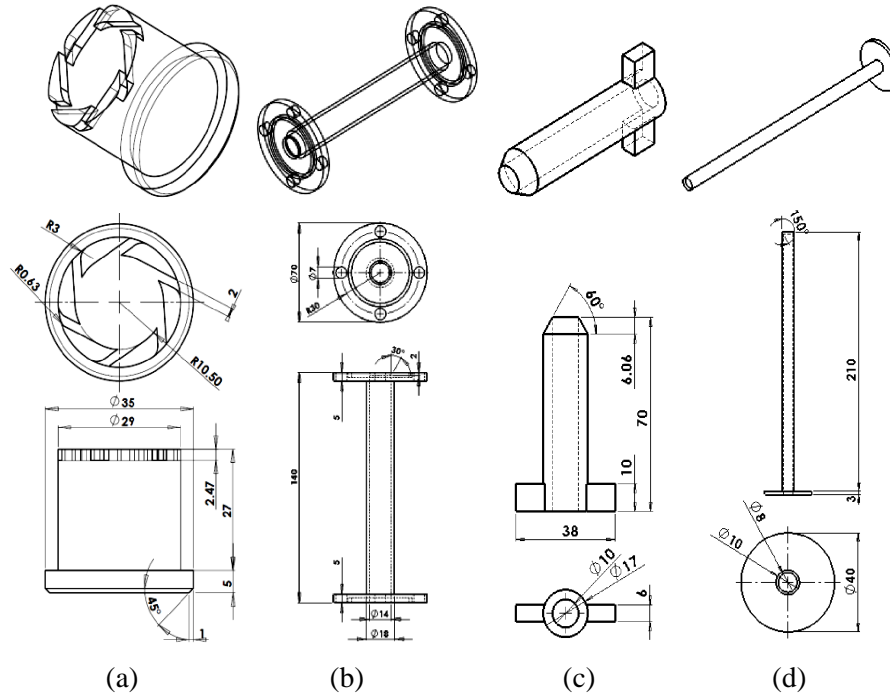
Each elements part of vortex tube: (a) Vortex generator, (b) Tube, (c) Throttle valve and (d) Separation tube.
